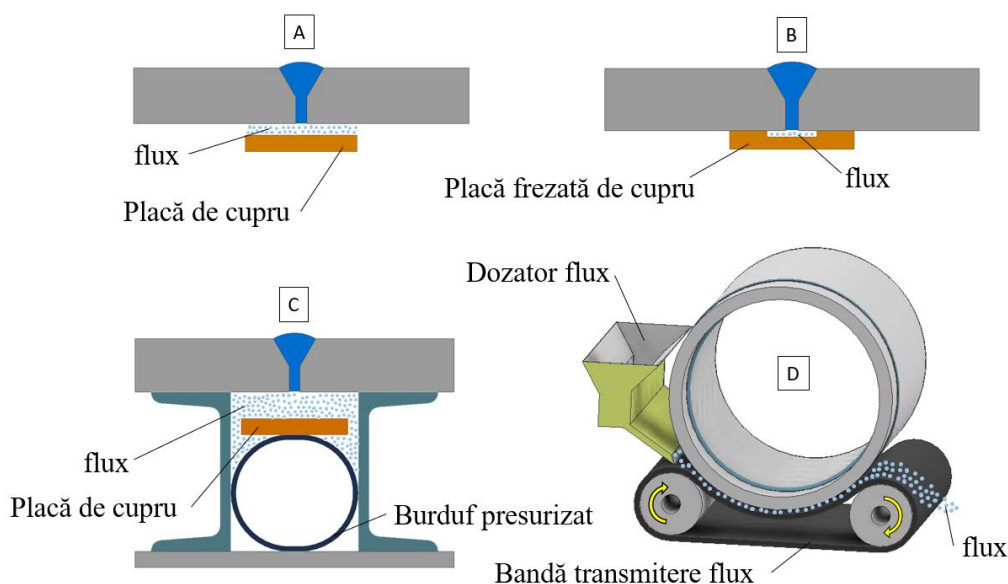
/2.7 – Diagram of the Submerged Arc Welding Equipment [8/33]
